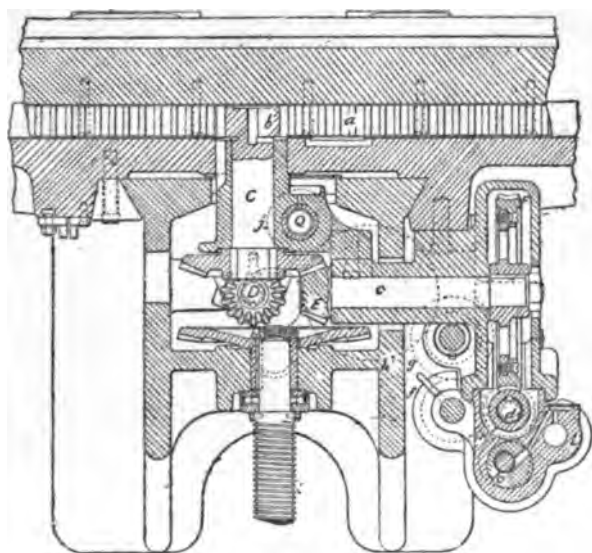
Transverse Section through Knee and Table, No. 5 Miller.
